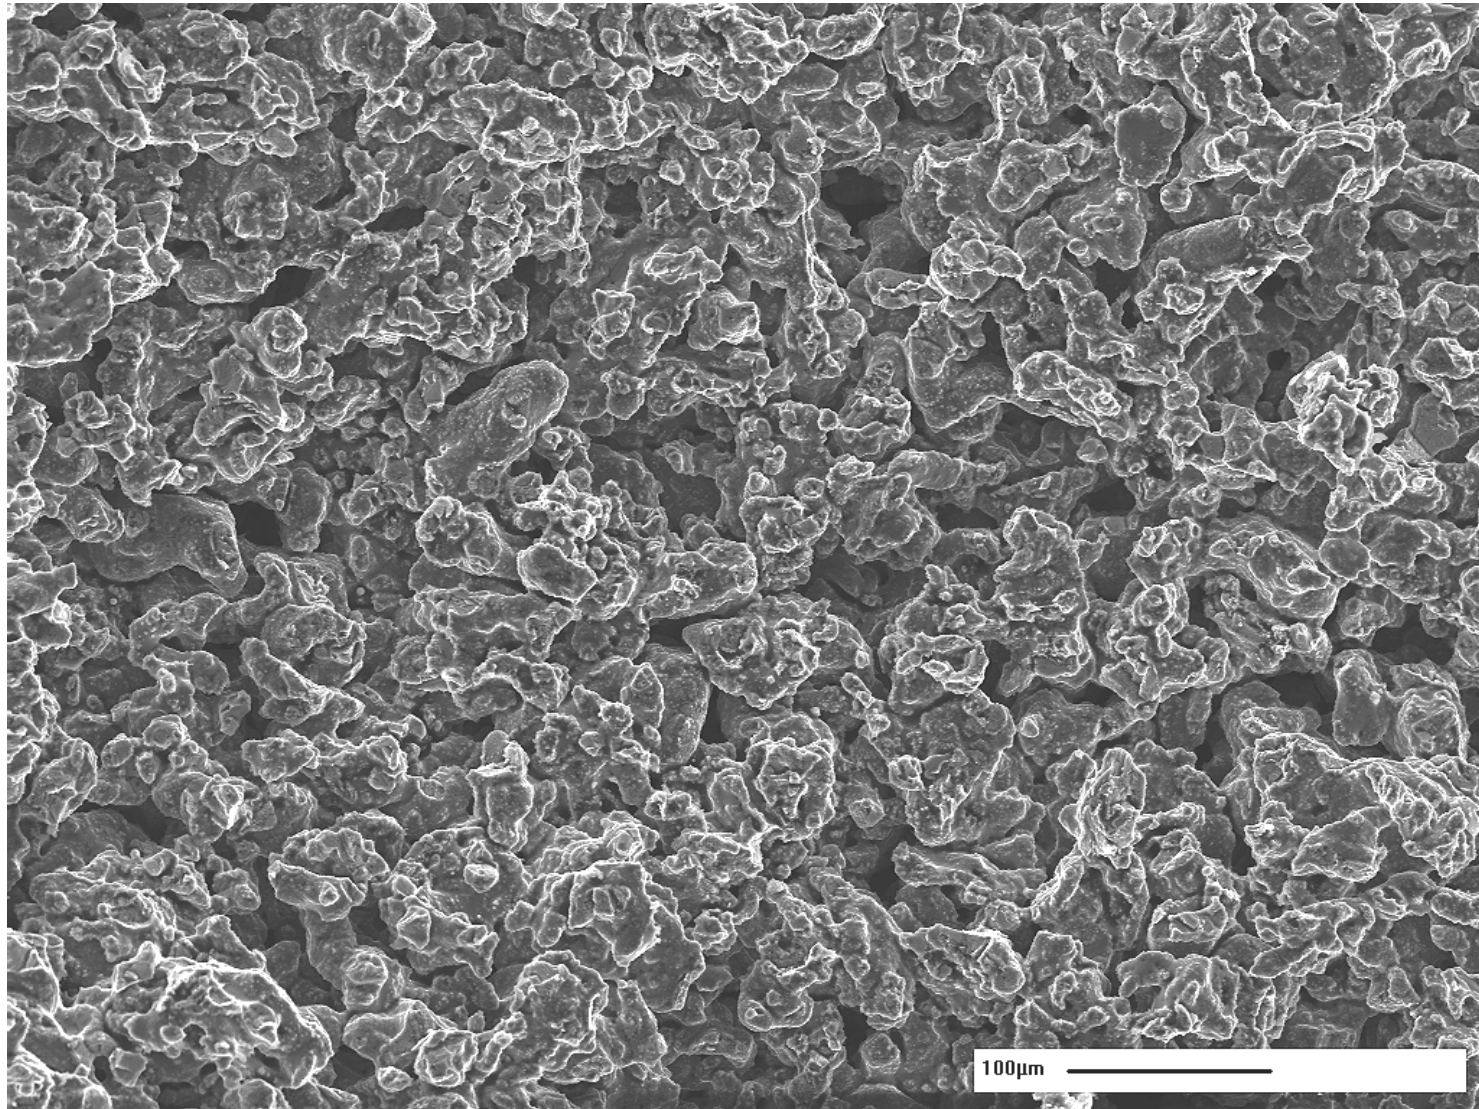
Fracture Surface of Fe₃Al Tensile Specimen Tn-Ax-22
